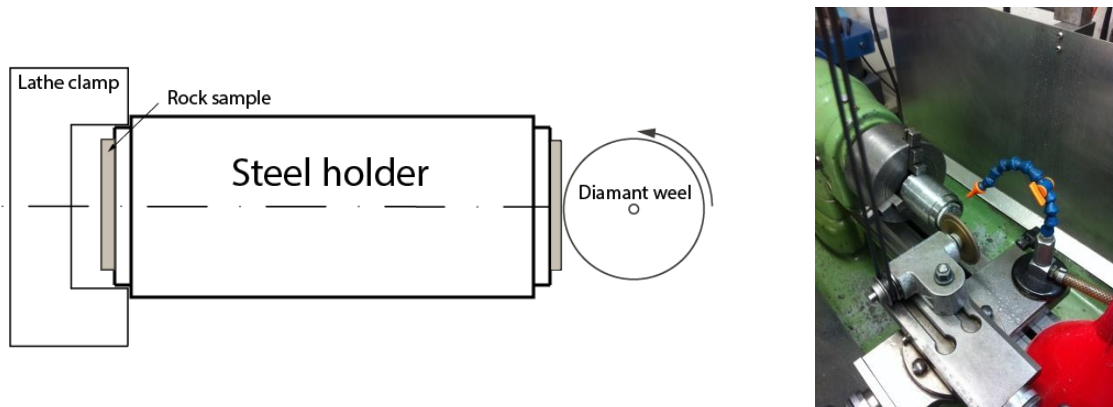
Lathe assembly, rotational direction of lathe should be in opposition compared to the rotational direction of the diamante wheel.
